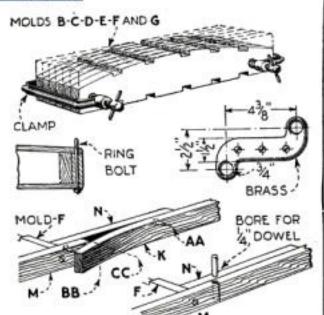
The molds clamped together for marking and cutting; how to make a neat harness fixture from brass, and other details
